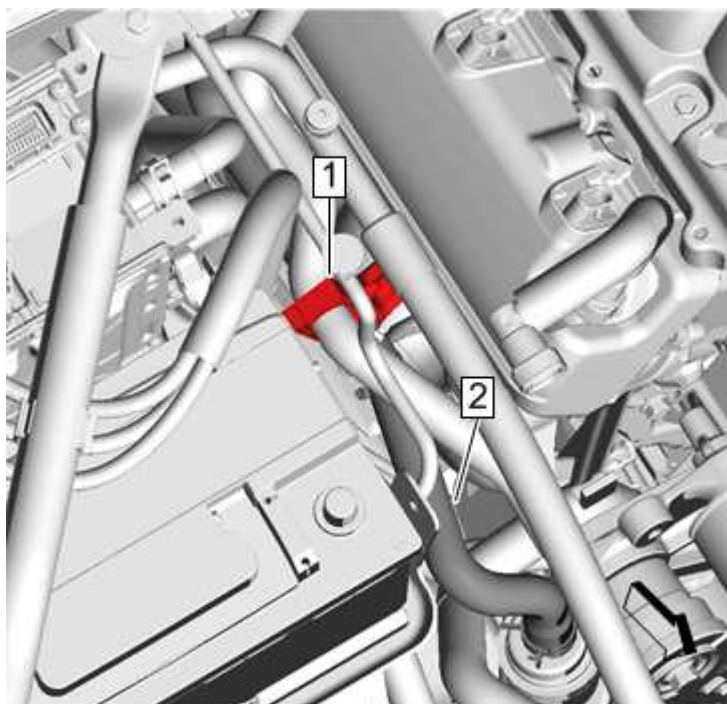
Heater Outlet Hose At Heater Inlet and Outlet Hose Bracket
